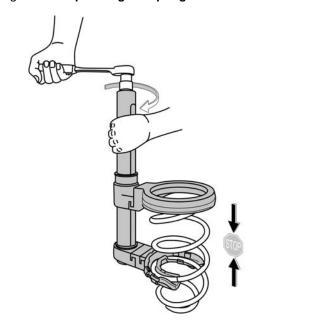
If necessary, relieve pressure on the spring via the auxiliary drive.
